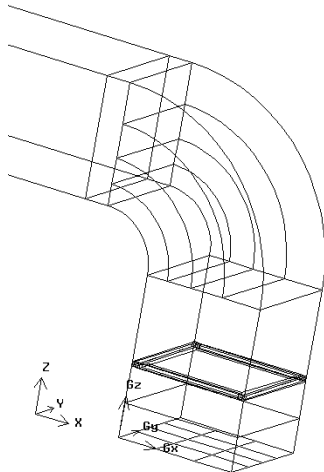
3d wire frame view of the BTA drying chamber with tray
